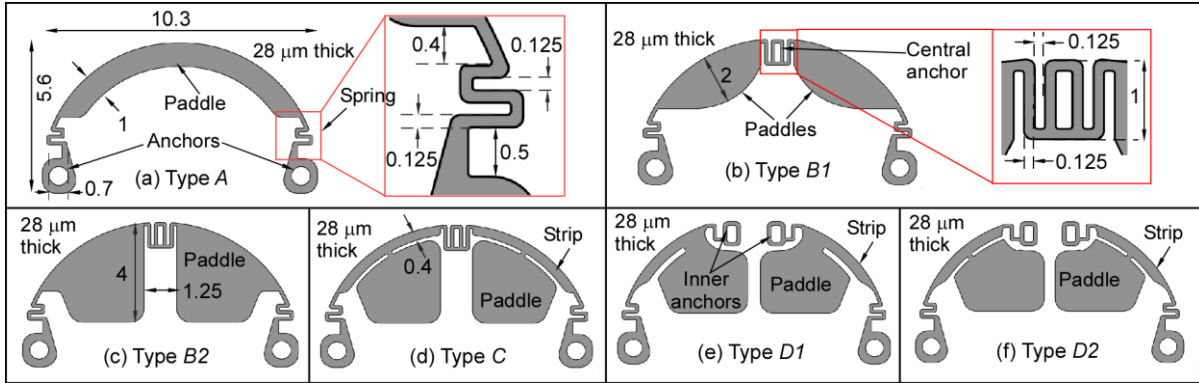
Dimensions of the six actuator designs (in mm).
